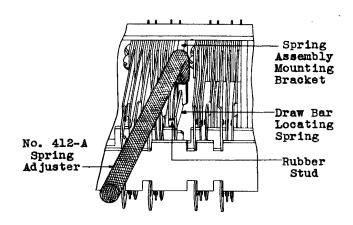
Method of Tensioning Draw Bar Locating Spring
